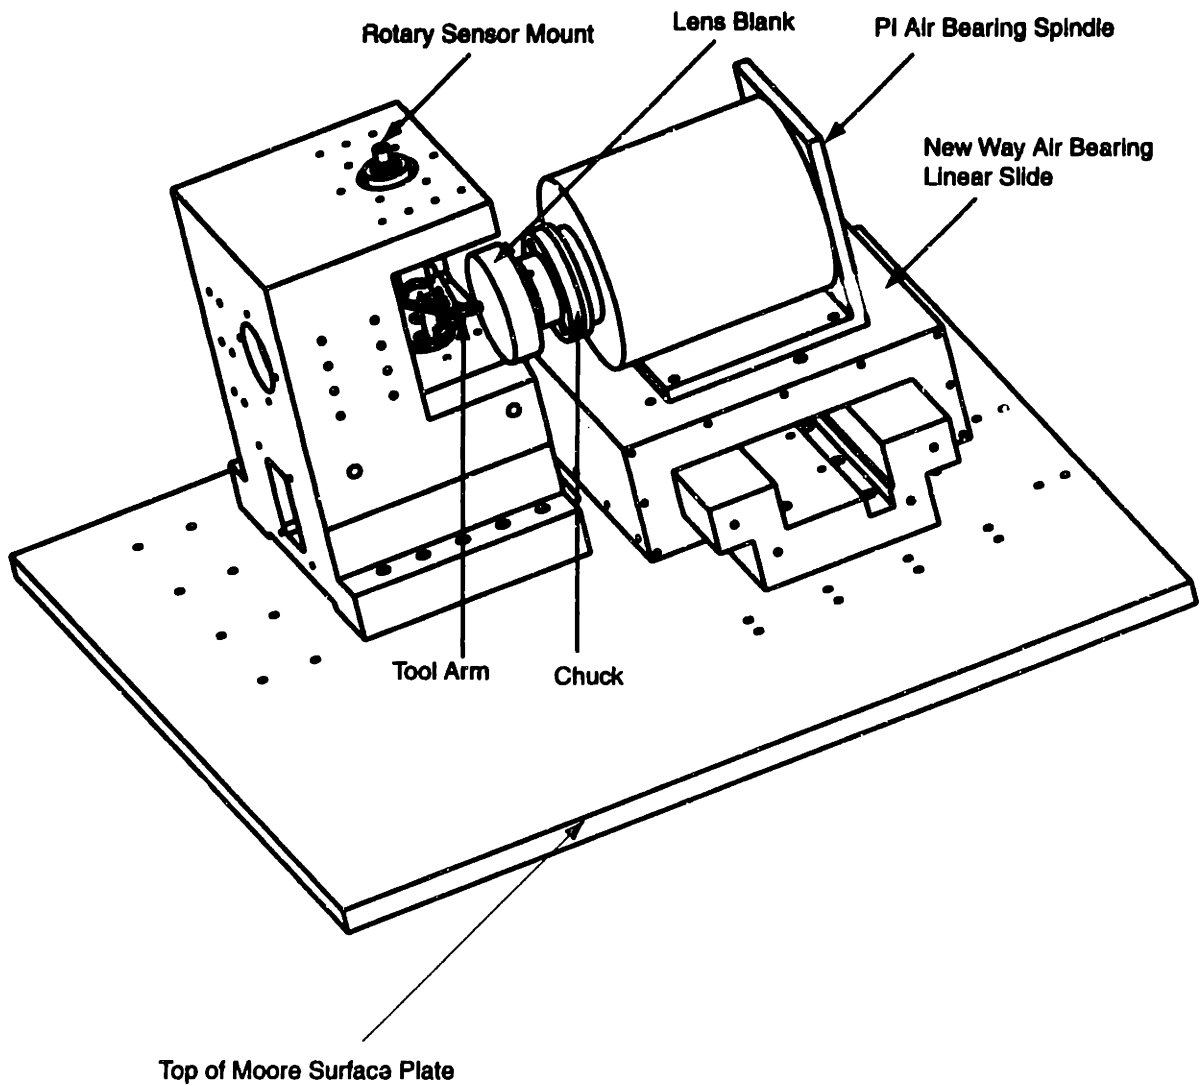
Drawing of the prototype Diamond Turning Machine.
